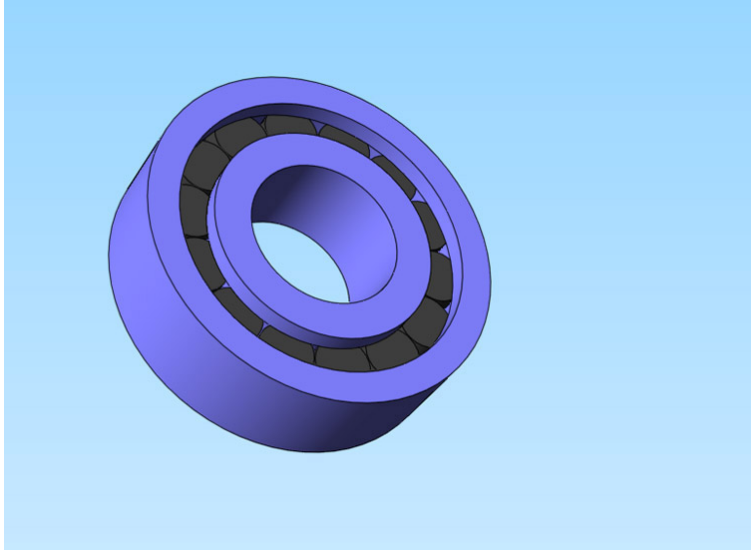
SolidWorks model of a FAG cylindrical roller bearing
